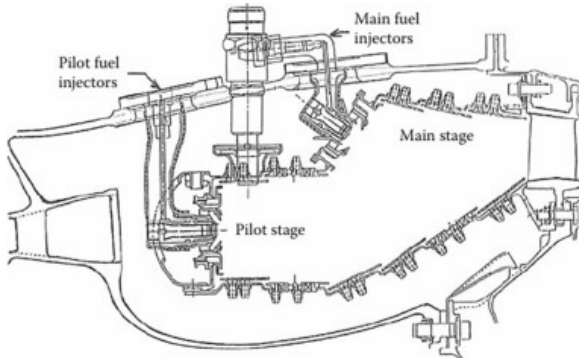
Axially Staged Combustor geometry (Pratt & Whitney V2500-A5) [8].
